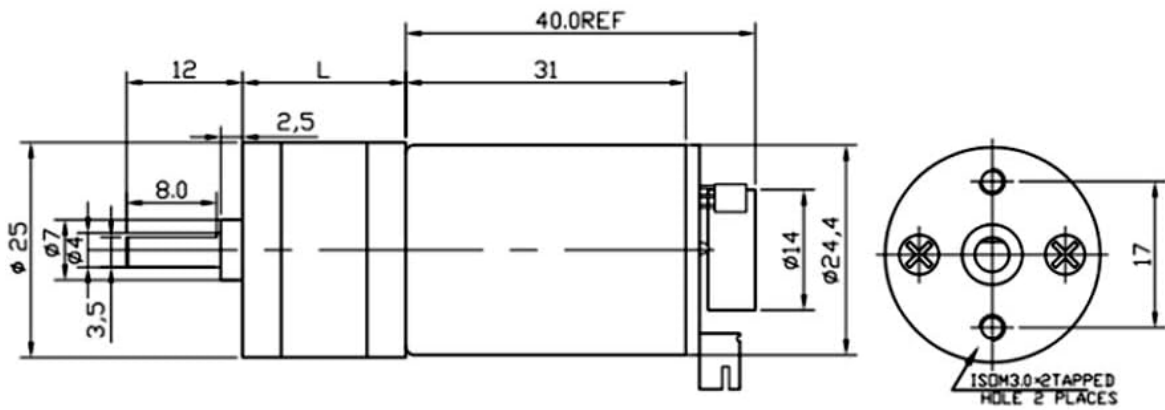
Dimensional drawing of the GA25-370 motor (dimensions in millimeters).
